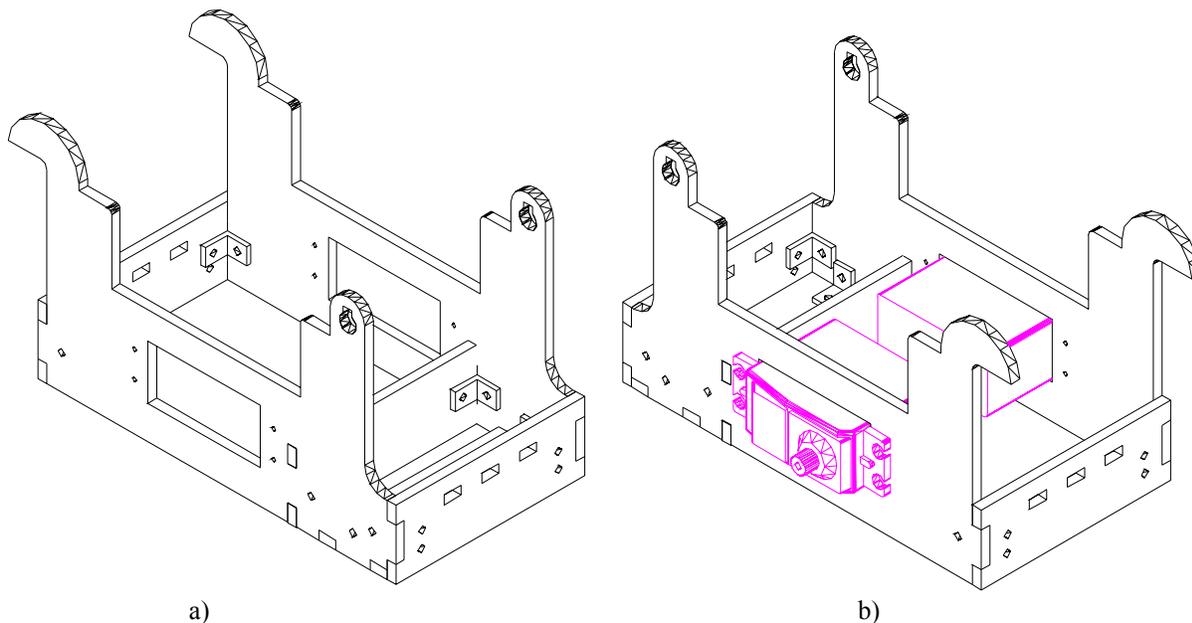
Completed assembly of the TJ-AVR™ robot chassis a), with servos mounted b).
